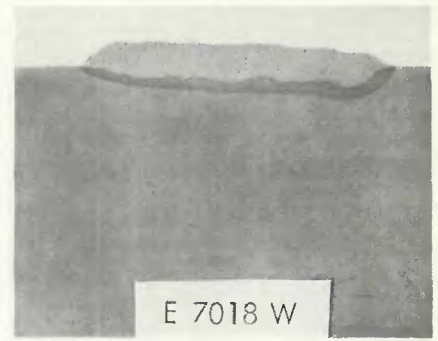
Typical cross section from Battelle Longitudinal Underbead cracking test. Nitral etch, x1
